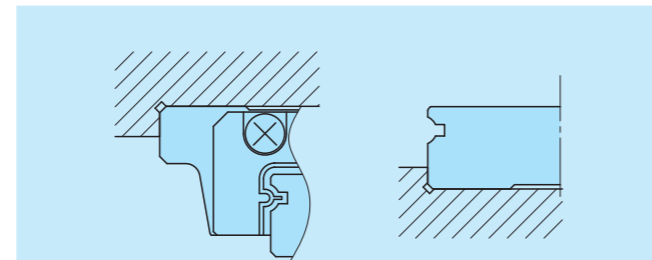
Relieved fillet at the corner of the mating reference mounting surfaces
